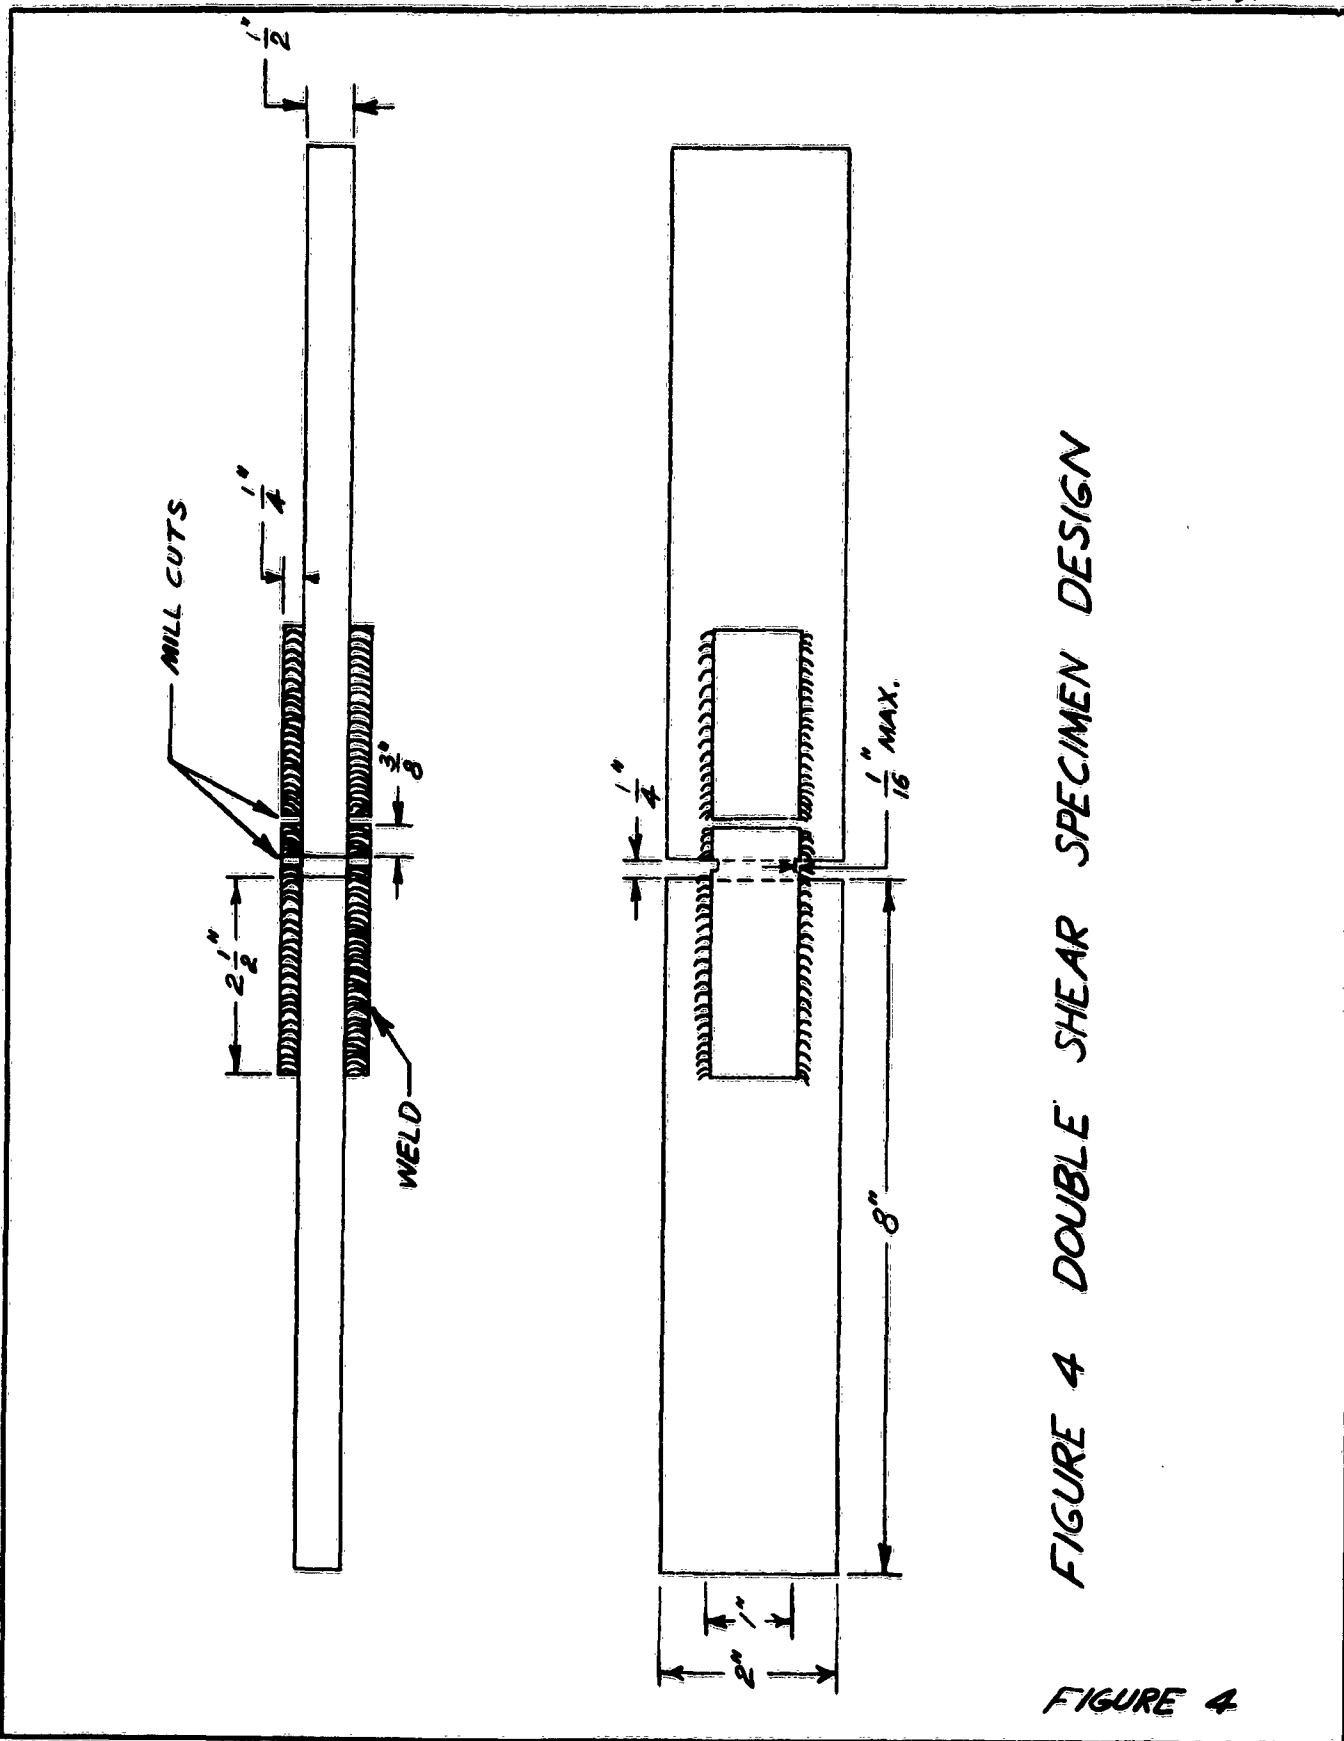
DOUBLE SHEAR SPECIMEN DESIGN
